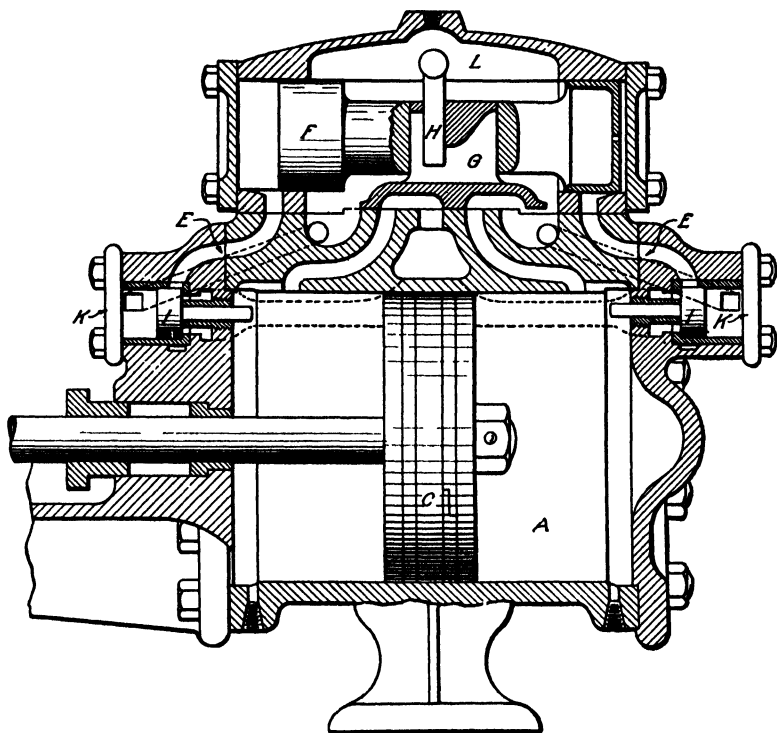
Section of Pump Cylinder Showing Valve Operated with Tappet
